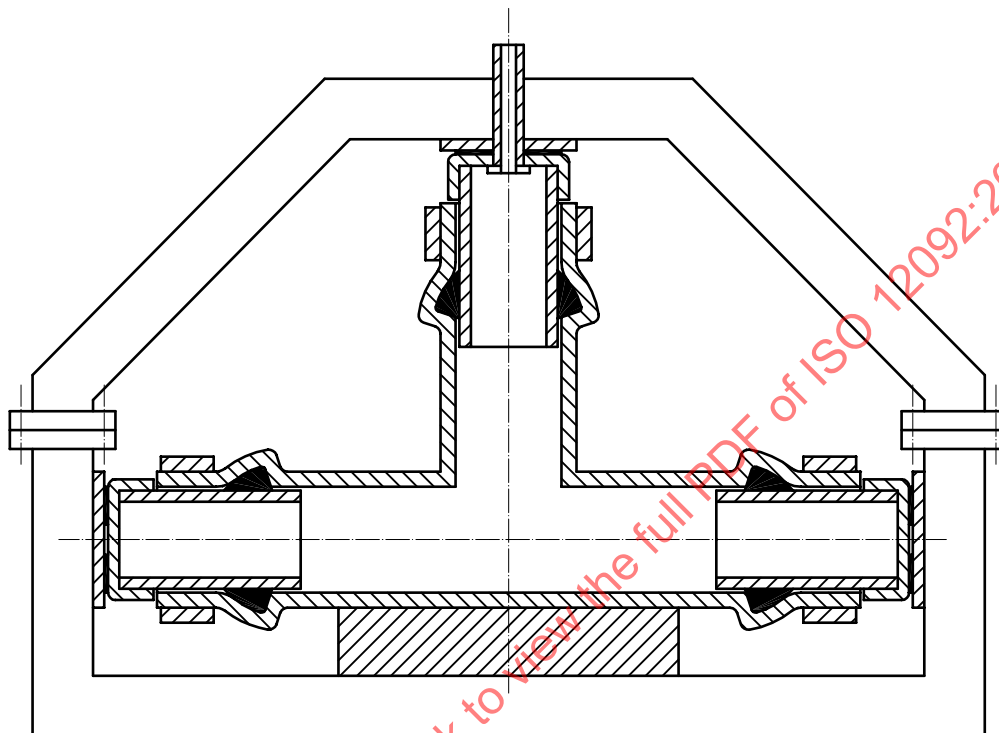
Example of a pressure-tight assembly using an external frame and without hydrostatic end thrust
